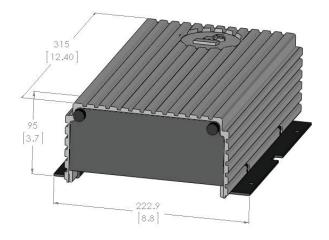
Cross-Band Simplex Only Capable - Dimensions mm / [in]
